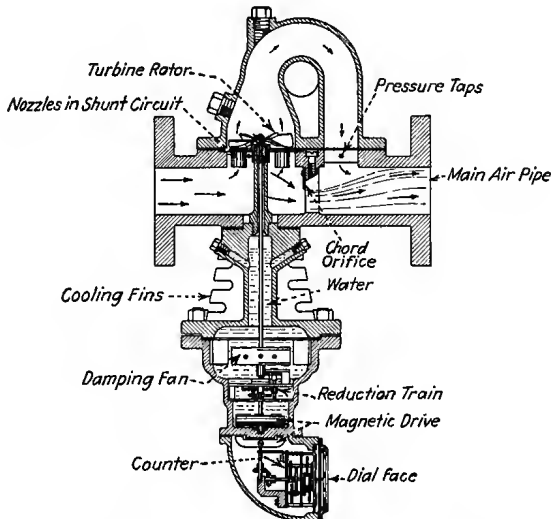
"Shunt" air meter. (Builders Iron Foundry.)
